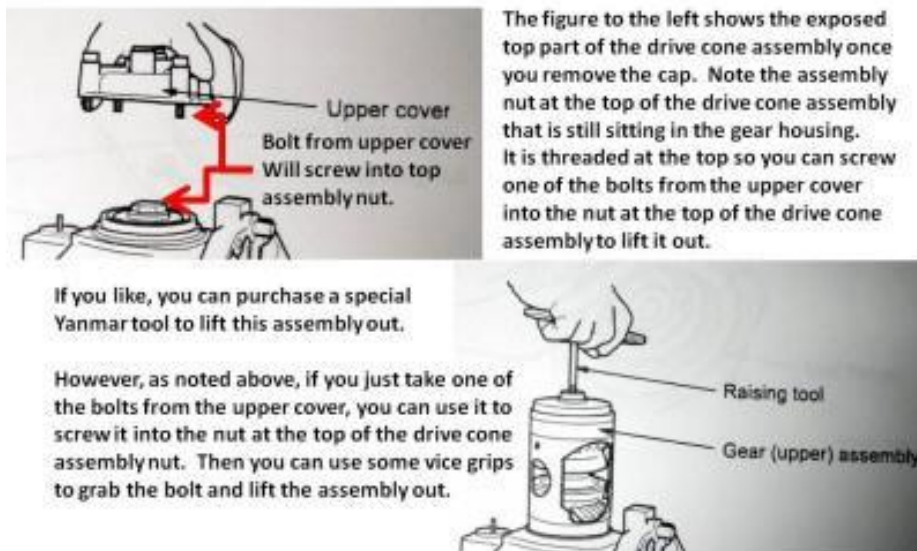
shows the exposed top part of the drive cone assembly once you remove the upper gear casing cover cap.
